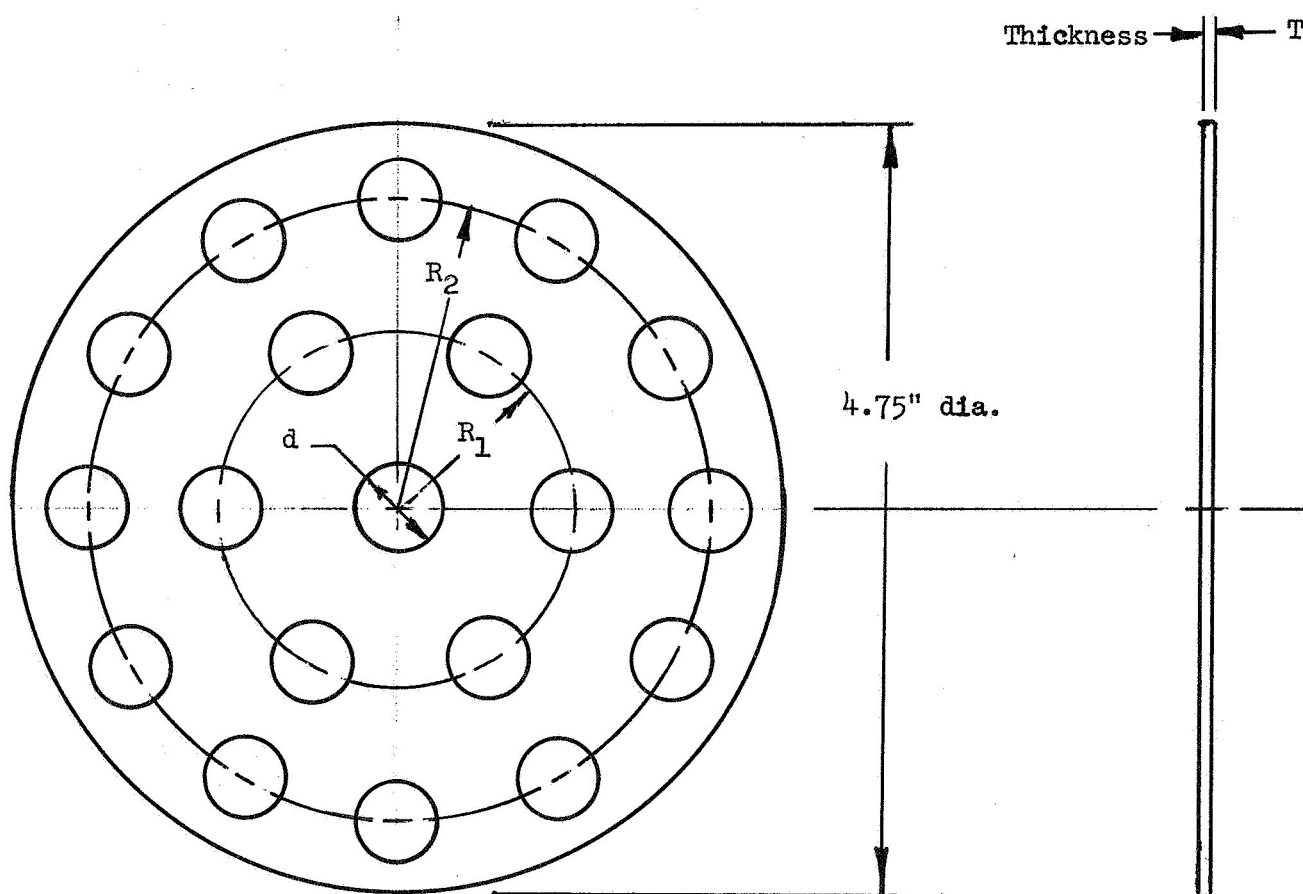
Typical hole layout pattern for plates with constant hole size. (See Table I)
